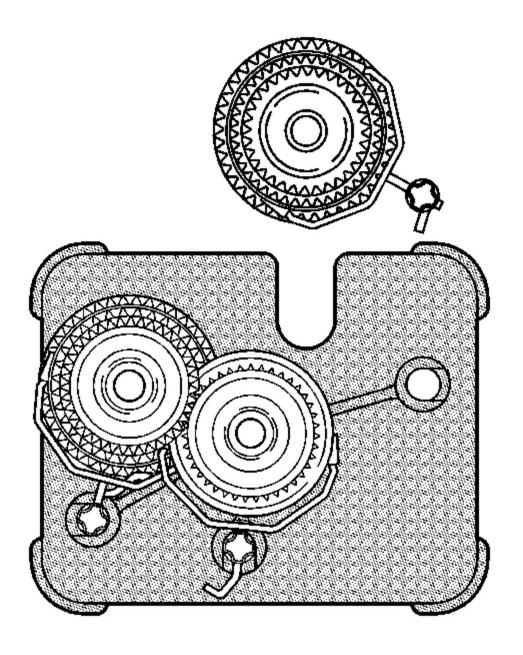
Intermediate Shaft, Shift Fork & J 44375 Courtesy of GENERAL MOTORS CORP.
